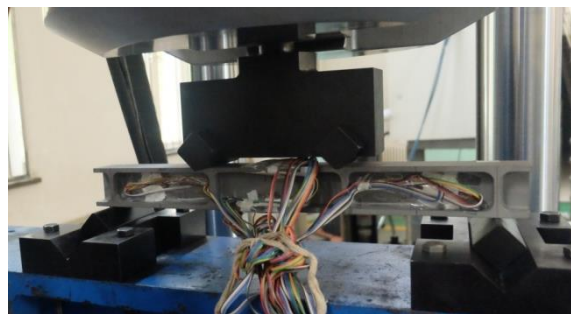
Schematic diagram of test jig for short beam fabricated by laser forming repair
